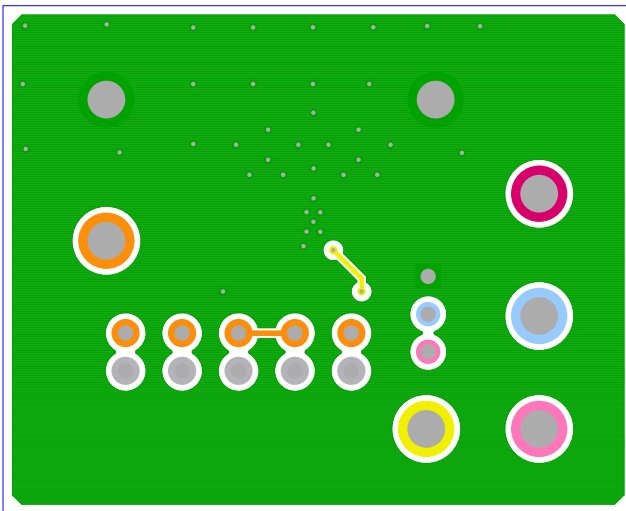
BOTTOM LAYER SOLDER SIDE
